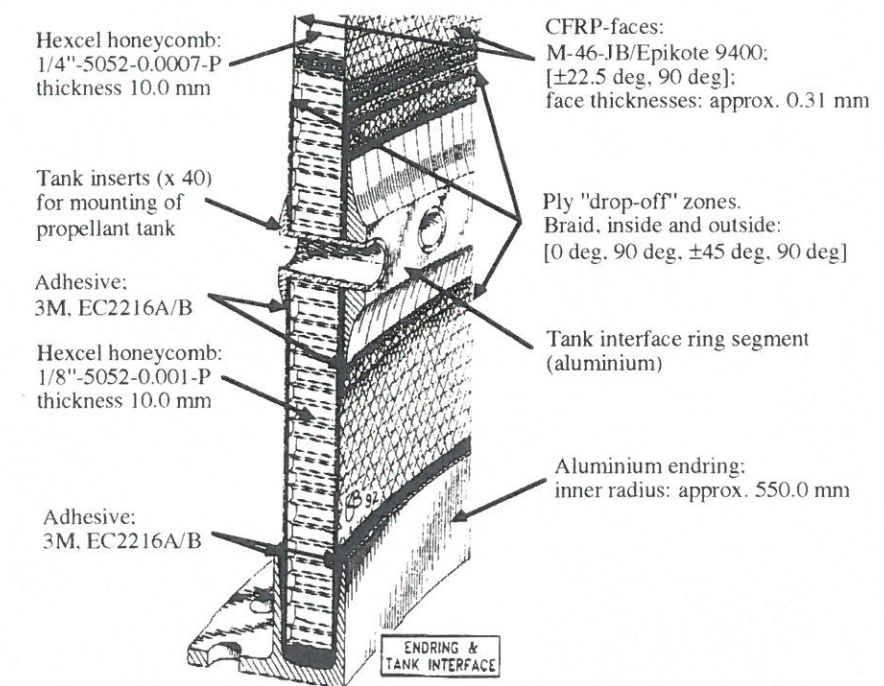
Design details of lower endring and tank interface of CFRP-sandwich satellite thrust cylinder; ESA-ASTP3 programme; demonstrator model (Courtesy of Stork Products Engineering B.V., The Netherlands).
